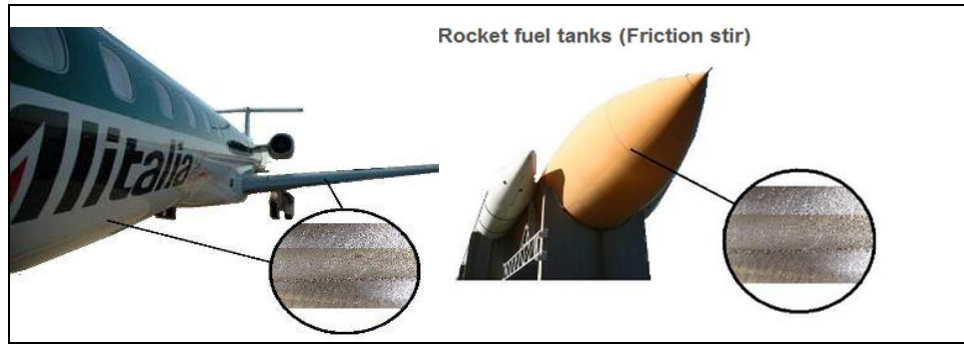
FSW aircraft paneling (left), and FSW rocket fuel tank (right) [57].
